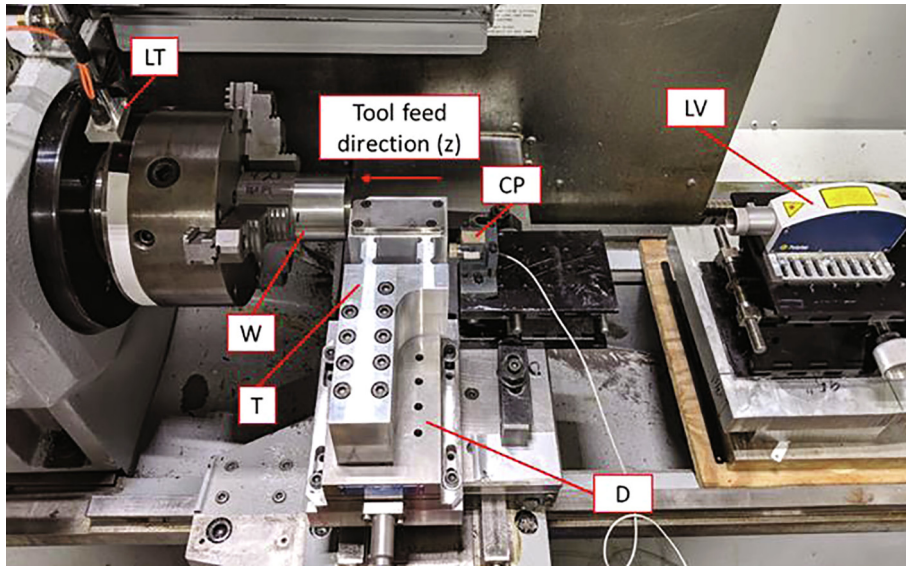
Photograph of tube turning setup including workpiece (W), dynamometer (D), flexure-based cutting tool (T), laser tachometer (LT), laser vibrometer (LV), and capacitance probe (CP).
